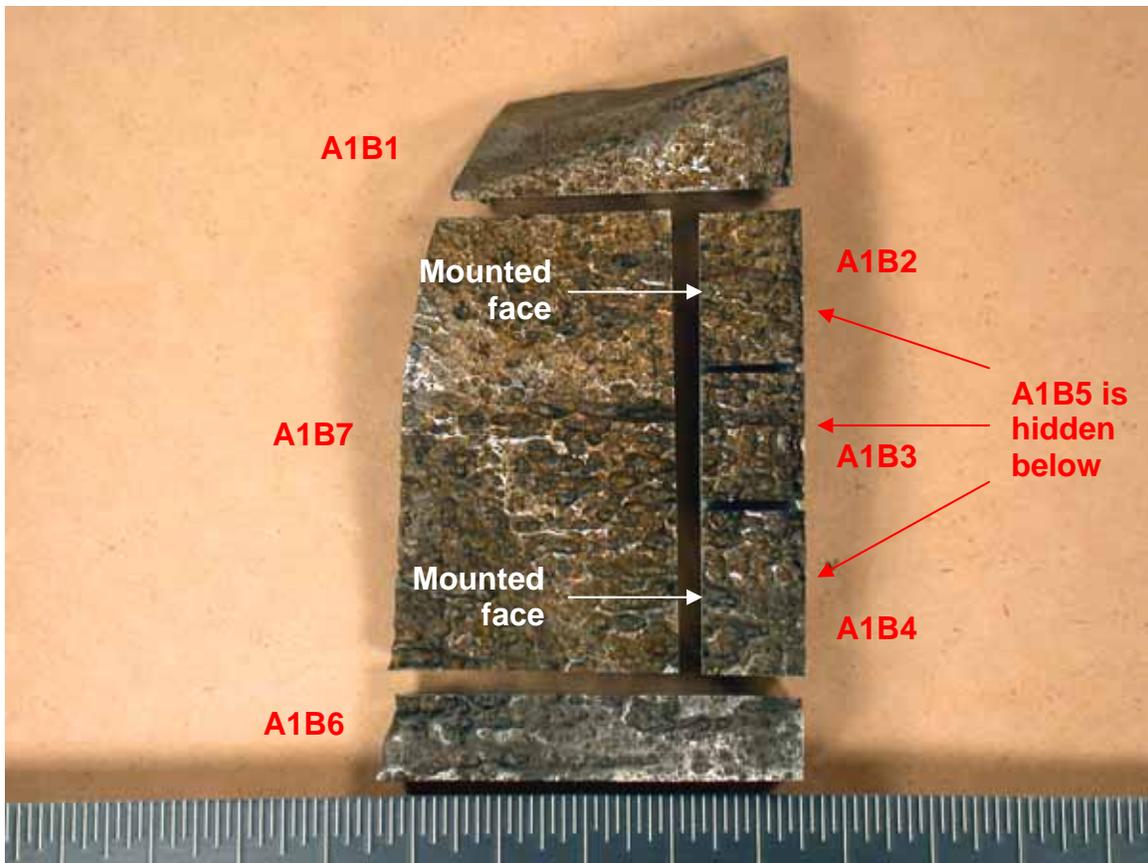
Section photo for Piece A1B, looking at the cavity side wall. The mounted surfaces of Piece A1B2 and Piece A1B4 is indicated.
